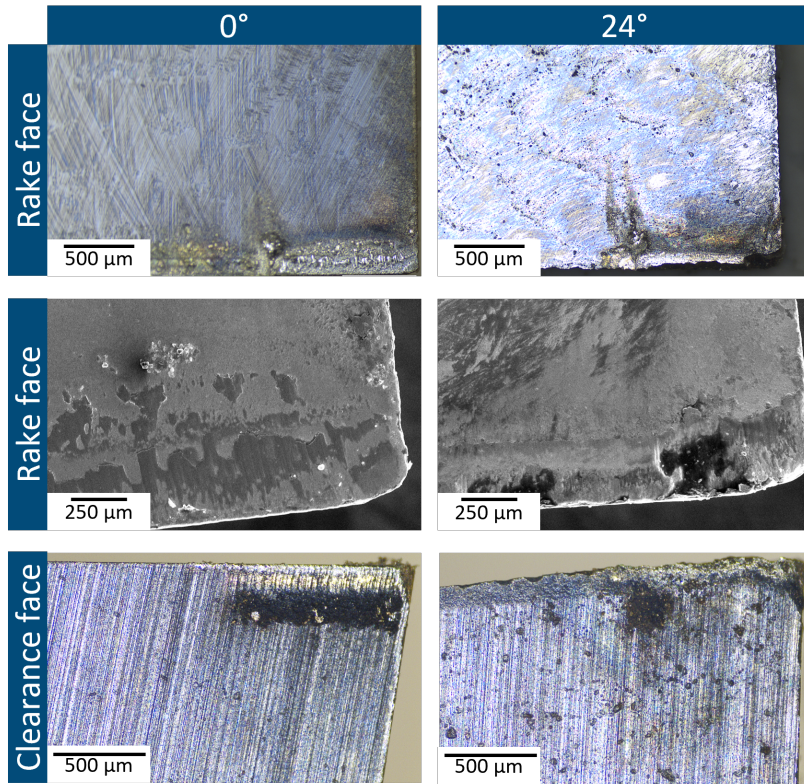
Microscopical pictures of the rake faces and clearance faces of the tools in CW724R after 208 min.
